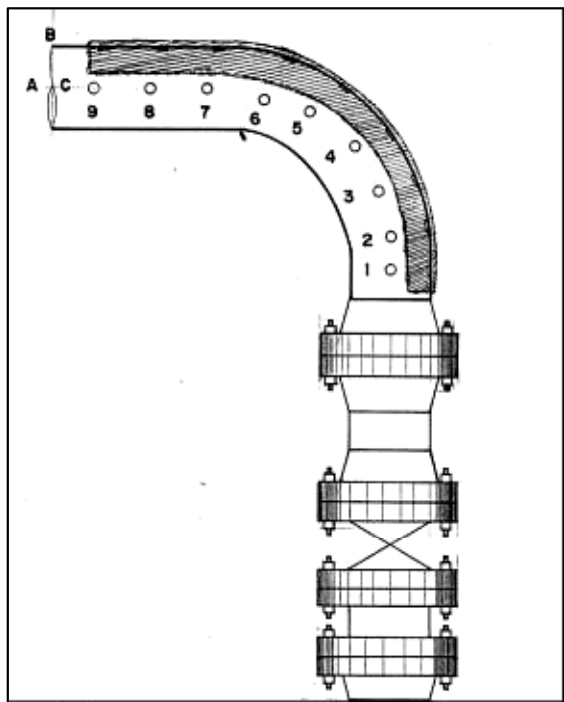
BL-1D Sweep "S" Bend Section (after Catacutan, 2000).
